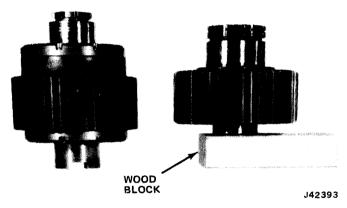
Differential and Drive Sprocket Positioned for Chain Installation
